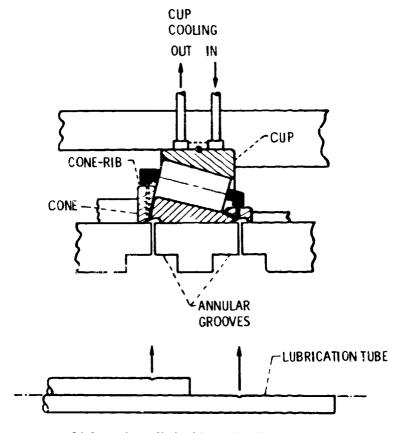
High-speed roller bearing with under-race lubrication and cooling.
